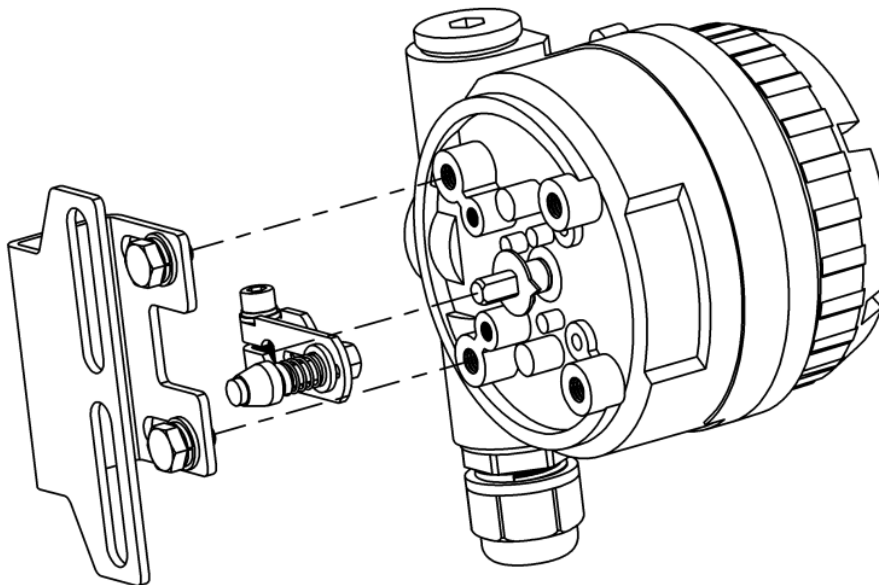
Feedback lever A and mounting bracket installation (remote type)
